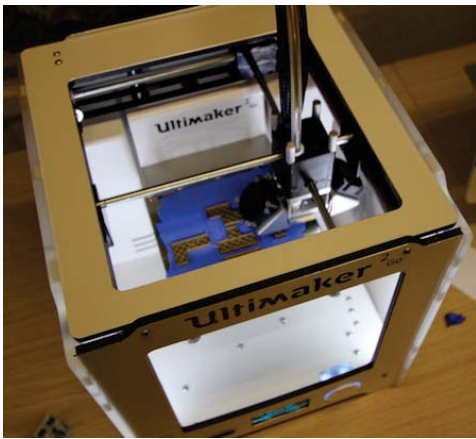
Ultimaker Go Filament-based portable printer showing the horizontal axes of extrusion head movement and the raise-able blue build plate.
